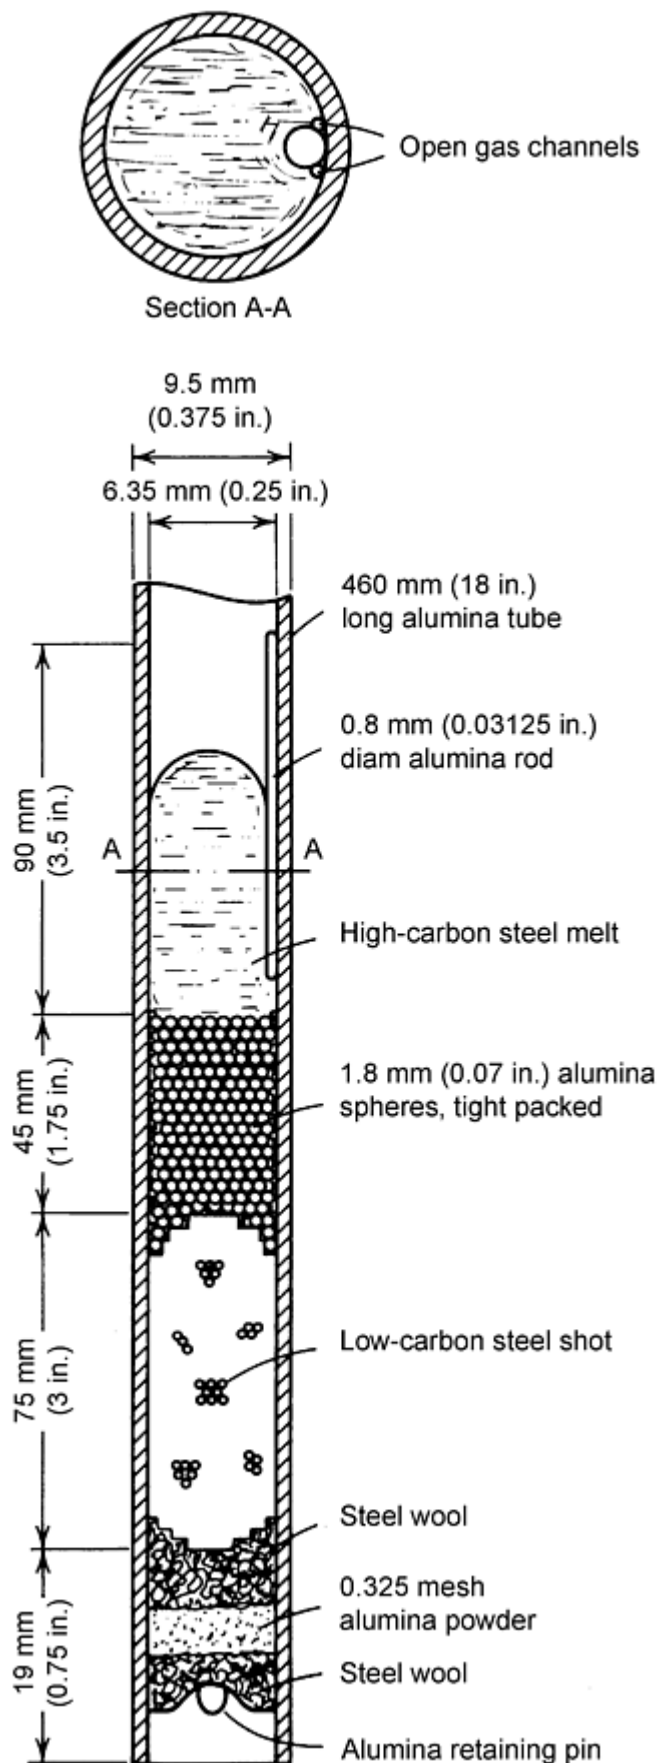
Mold arrangement for pressure impregnation of low-carbon steel compacts with a high-carbon steel melt (experimental process). Compact dimensions: 6.3 mm (0.25 in.) diam, 80 mm (3 in.) in length. Source: Ref 14
